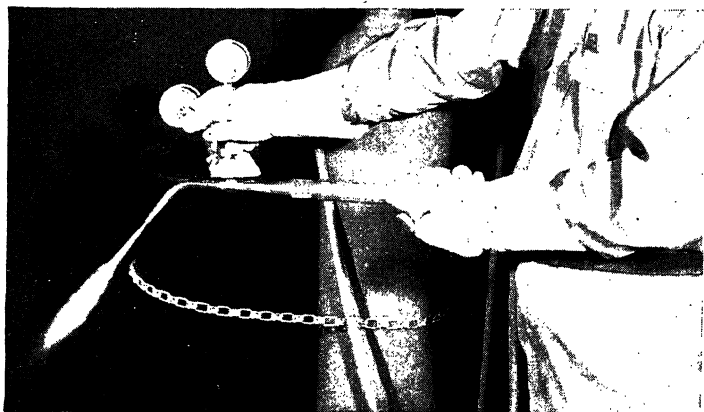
Adjusting flame. (Courtesy of Linde Air Products Co.)
